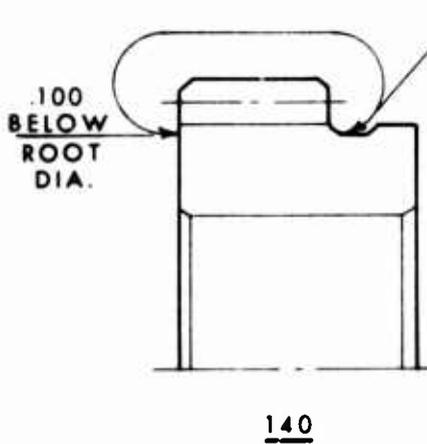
, RG351-11278-046: Machine Operation Drawing.
